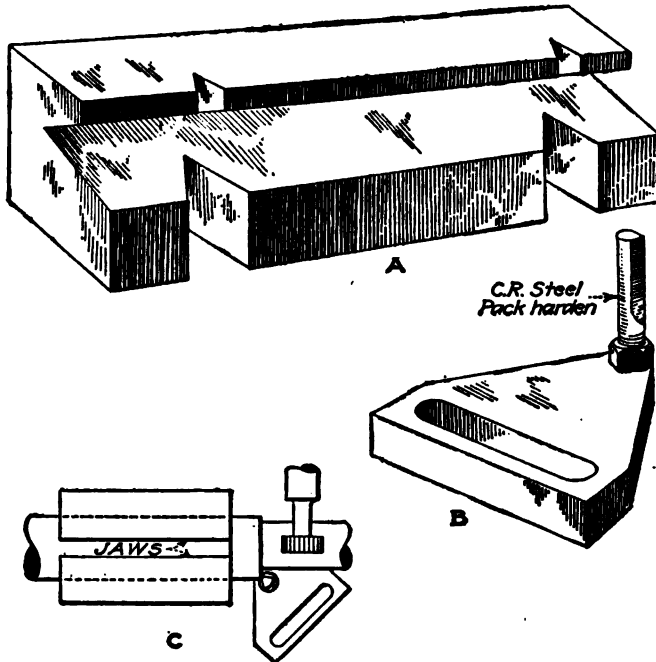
MILLING MACHINE VISE JAW AND WORK STOP
